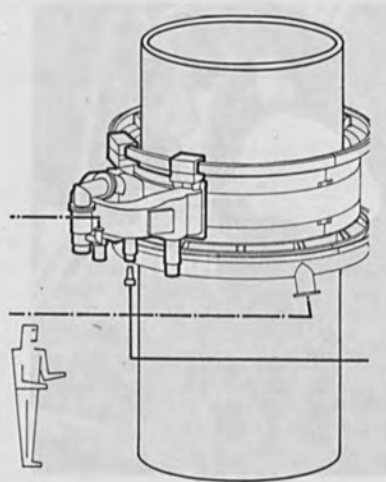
«Orbital» local vacuum E.B. welder
